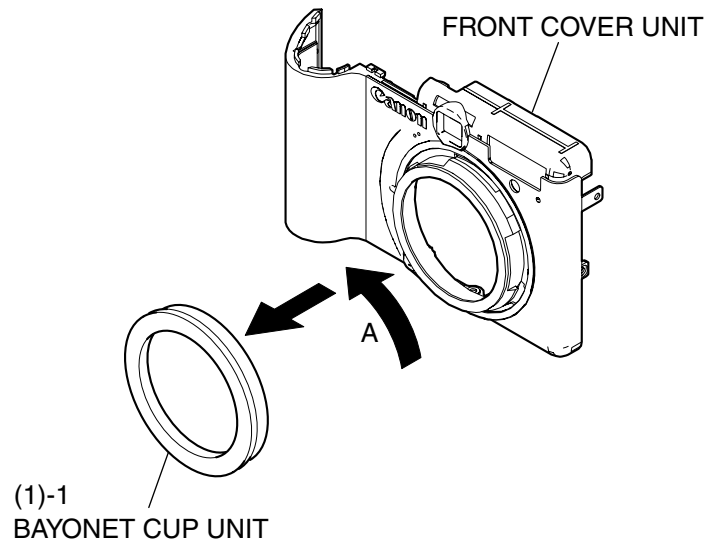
BAYONET CUP UNIT, FRONT COVER UNIT
